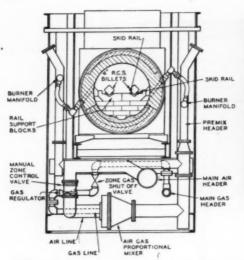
SECTION THROUGH A MODERN, CONTINUOUS, BILLET-HEATING FURNACE, EMBODYING THE HIGH-HEAD PRINCIPLE
